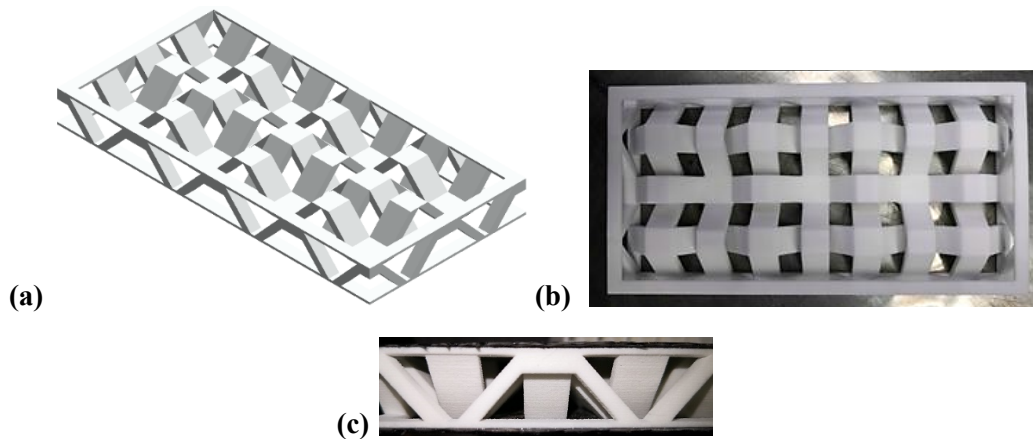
(a) A CAD model of the pyramid lattice structures (b) 3D printed sample (c) A side view showing the struts
